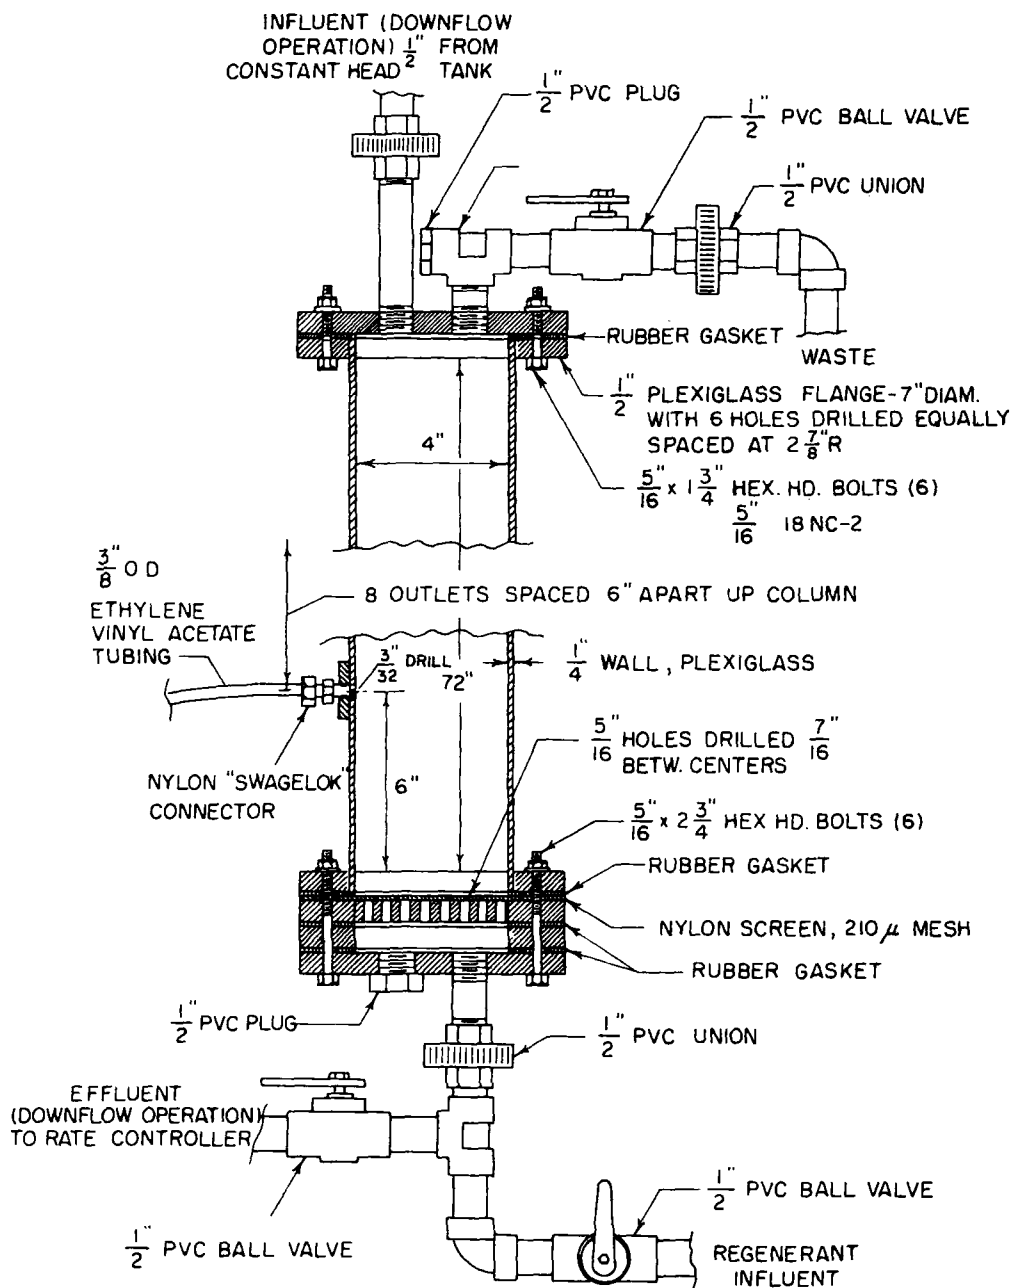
FIGURE I. DETAILS OF COLUMNS IN SERL COLUMN UNIT
